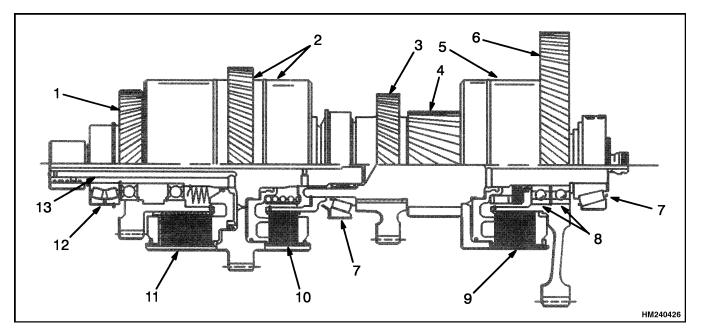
Reverse, Second, and First Speed-Shaft and Clutch Assemblies
